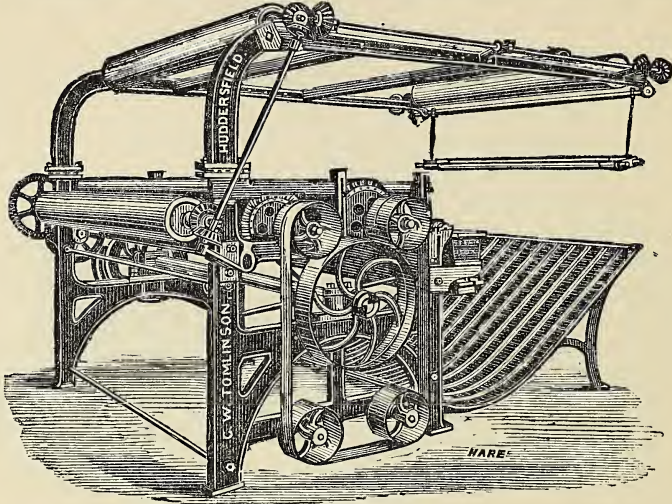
Double Brushing and Steaming Mill. (72 inches wide.)
